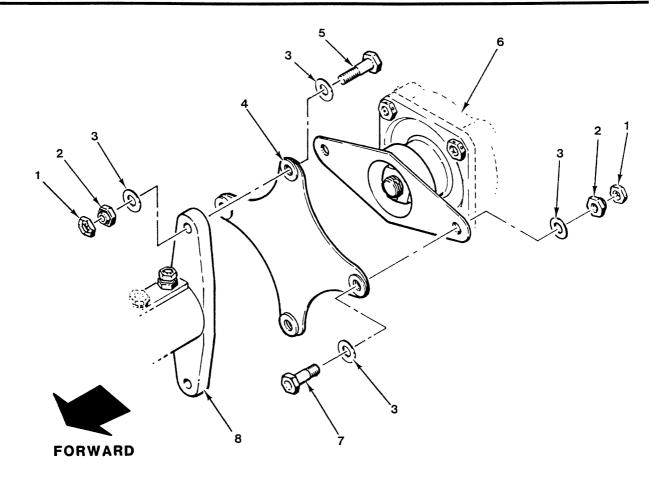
AFT FLEX PLATE INSTALLATION
